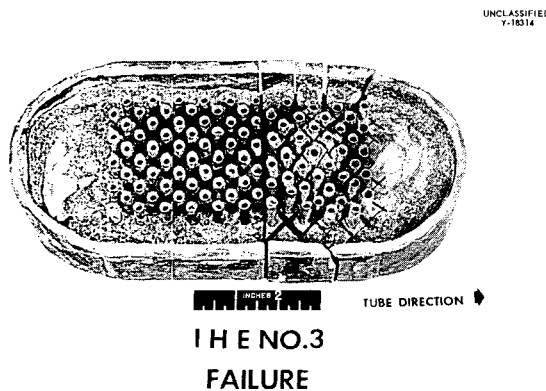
NaK Inlet Head After Dissection for Further Examination.
